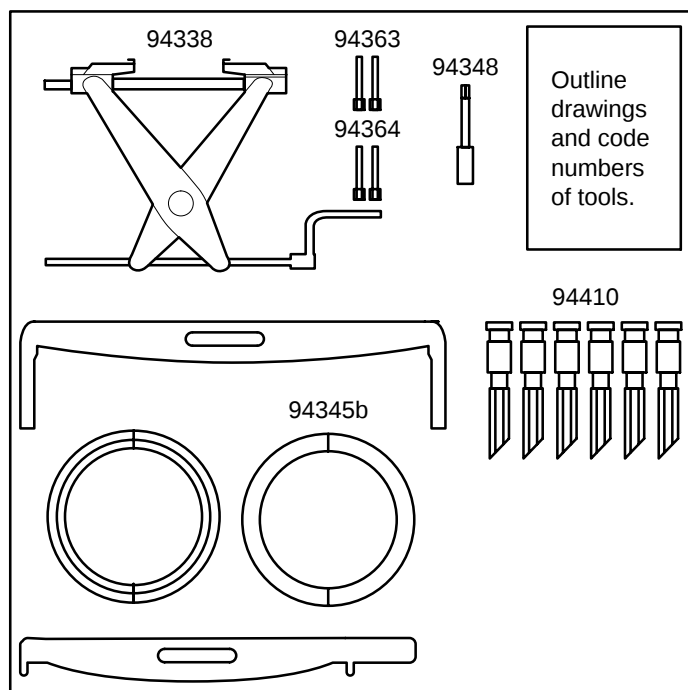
Tool panel 4: for cylinder liner / head dismantling
